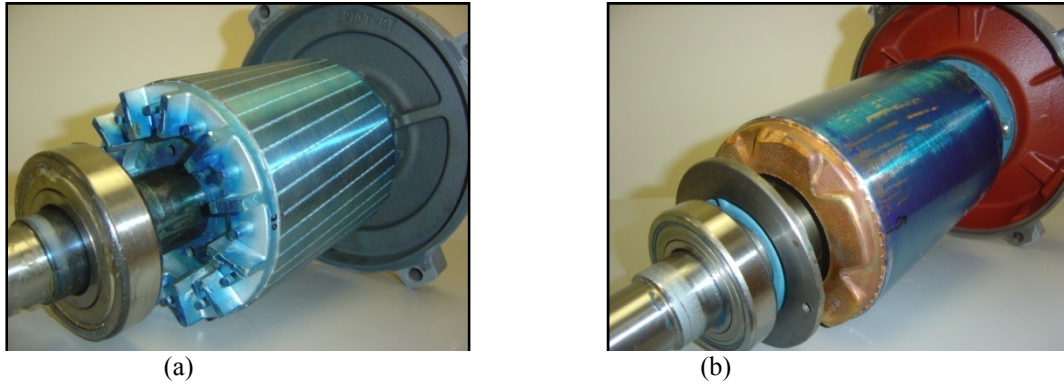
Rotors of the two 7.5 hp induction machines used in the investigations. (a) Aluminum-rotor. (b) Copper-rotor.
